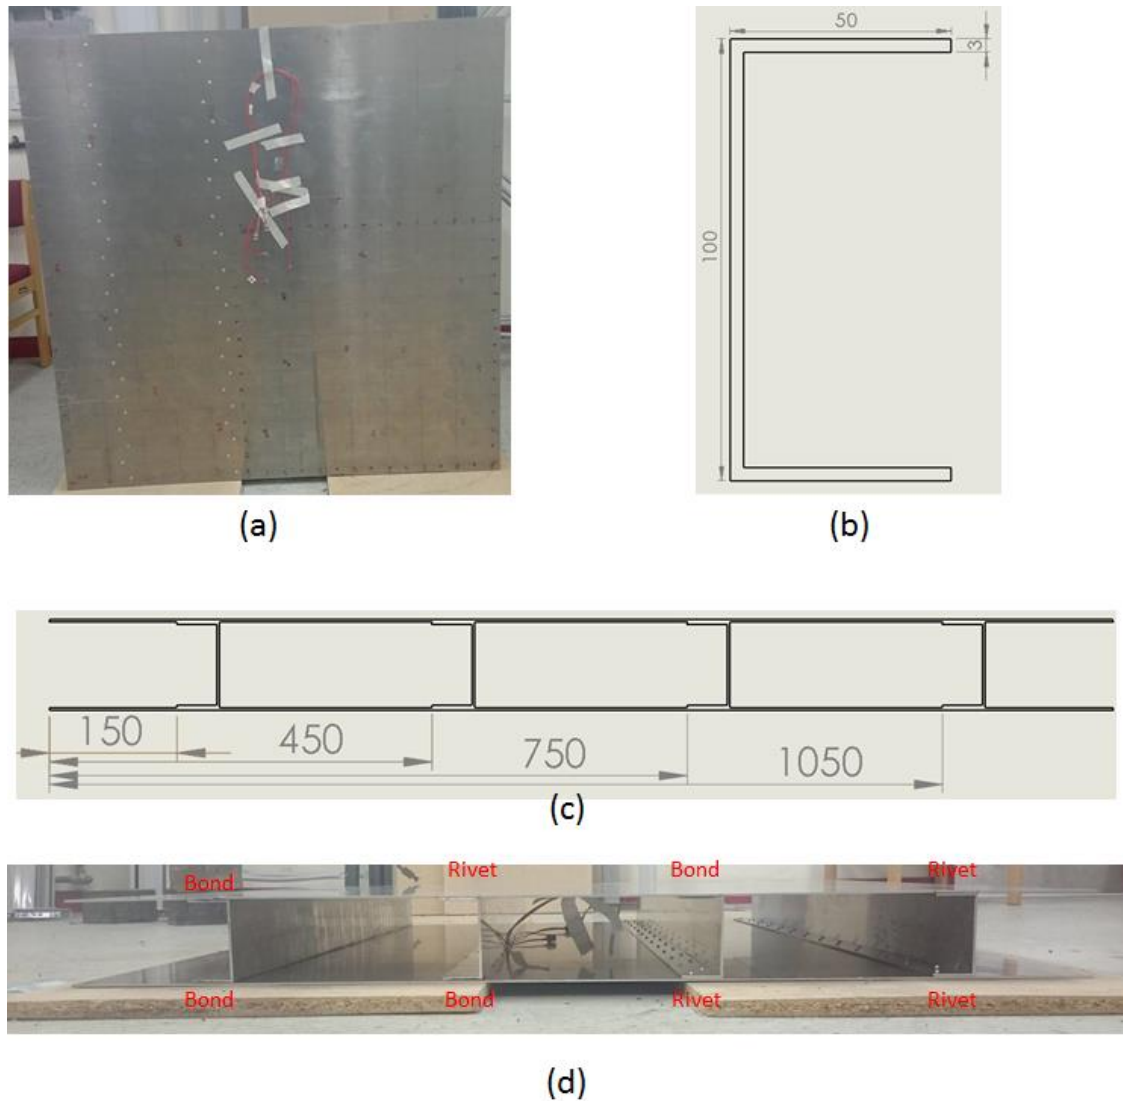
Complex aluminium panel front view (a), 'C' section stiffener schematic (b), side view schematic (c) and side view with type of attachment shown in red (d). All dimensions in mm.
